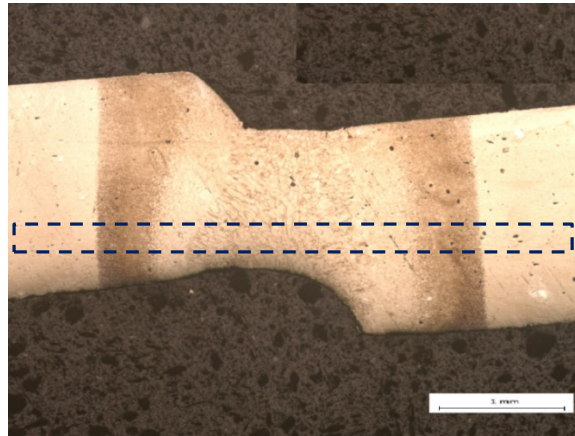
Wobbling welding, PLU=80 PLU
